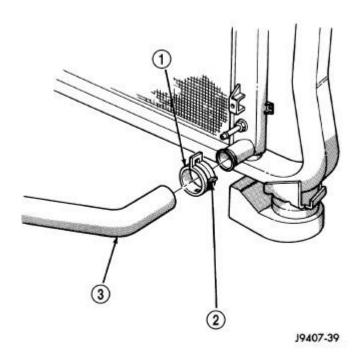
Removing/Installing Lower Radiator Hose Courtesy of CHRYSLER LLC
